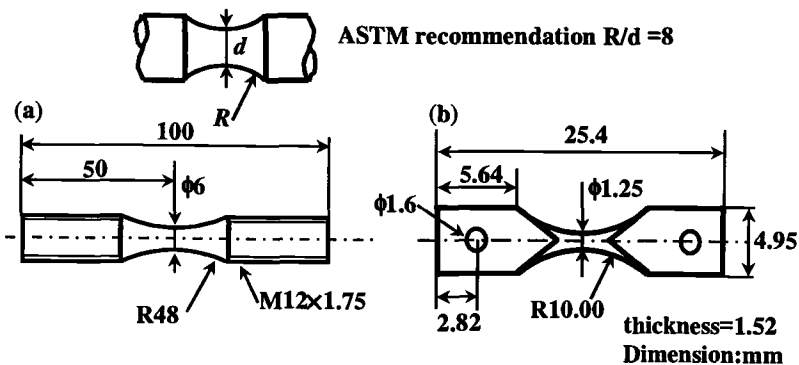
Dimensions of fatigue specimens (a) Full-sized specimen, (b) Mini-sized specimen.
